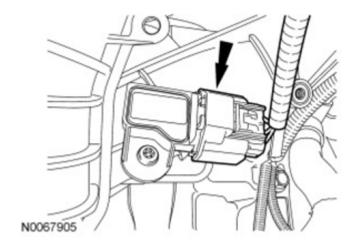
Locating Engine Oil Pressure (EOP) Switch Electrical Connector Courtesy of FORD MOTOR CO.
